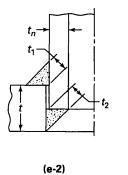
SOME ACCEPTABLE TYPES OF WELDS FOR FITTINGS, NOZZLES, AND OTHER CONNECTIONS TO SHELLS, DRUMS, AND HEADERS
